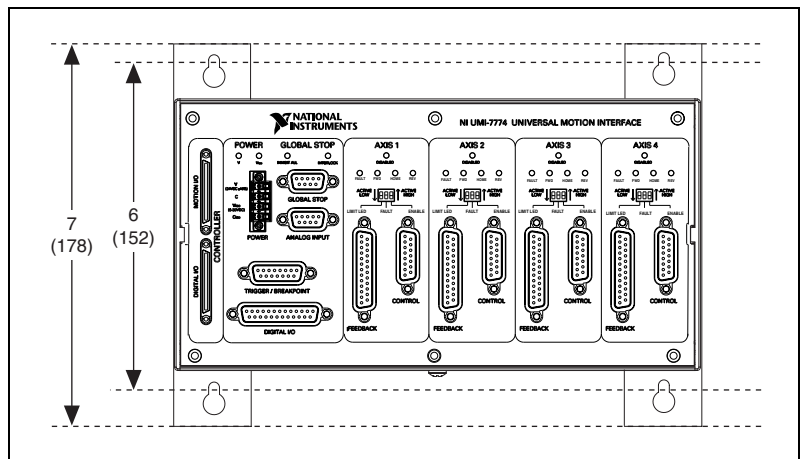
UMI-7774/7772 Front View with Vertical Panel Mount Dimensions
